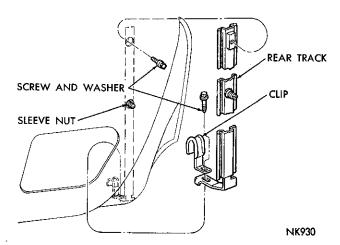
Rear Door Glass Rear Track (Chrysler Hard Top)
